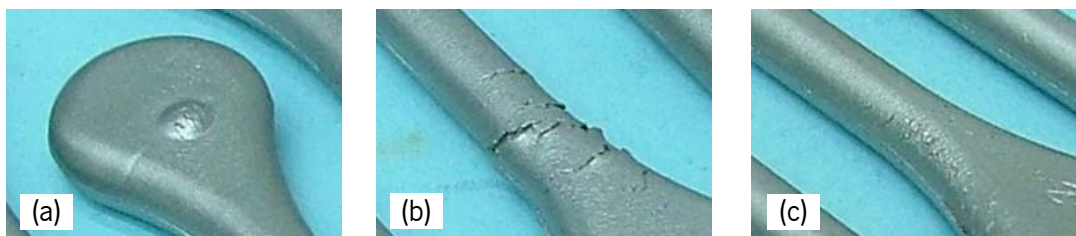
Detail of the defects observed on the surface of the sintered parts: blistering (a) and peeling (b) with feedstock FS-03-66 and non-smooth surface (c) with feedstock FS-09-66.
